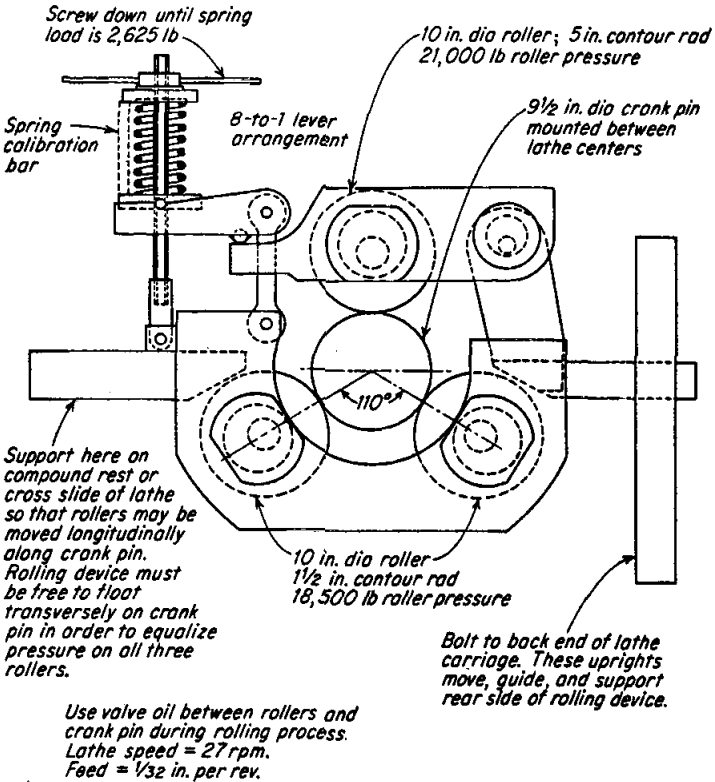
Diagram of fixture for stress rolling locomotive crank pins.⁶
